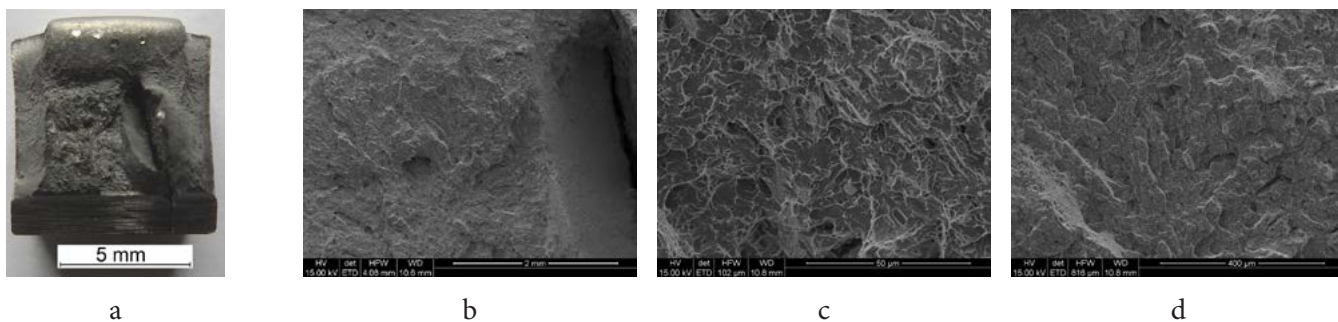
Macrophotography of the specimen fracture (a, b) with a fractographic illustration: c – primarily plastic fracture; d – at the central part – mixed fracture
